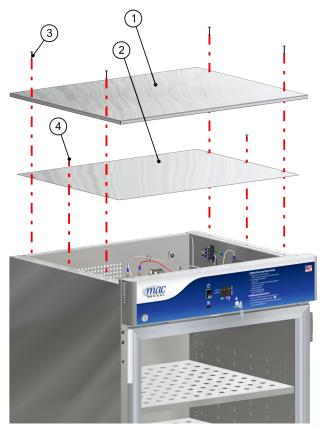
Remove/Re-install Top Panels - Free Standing Units
